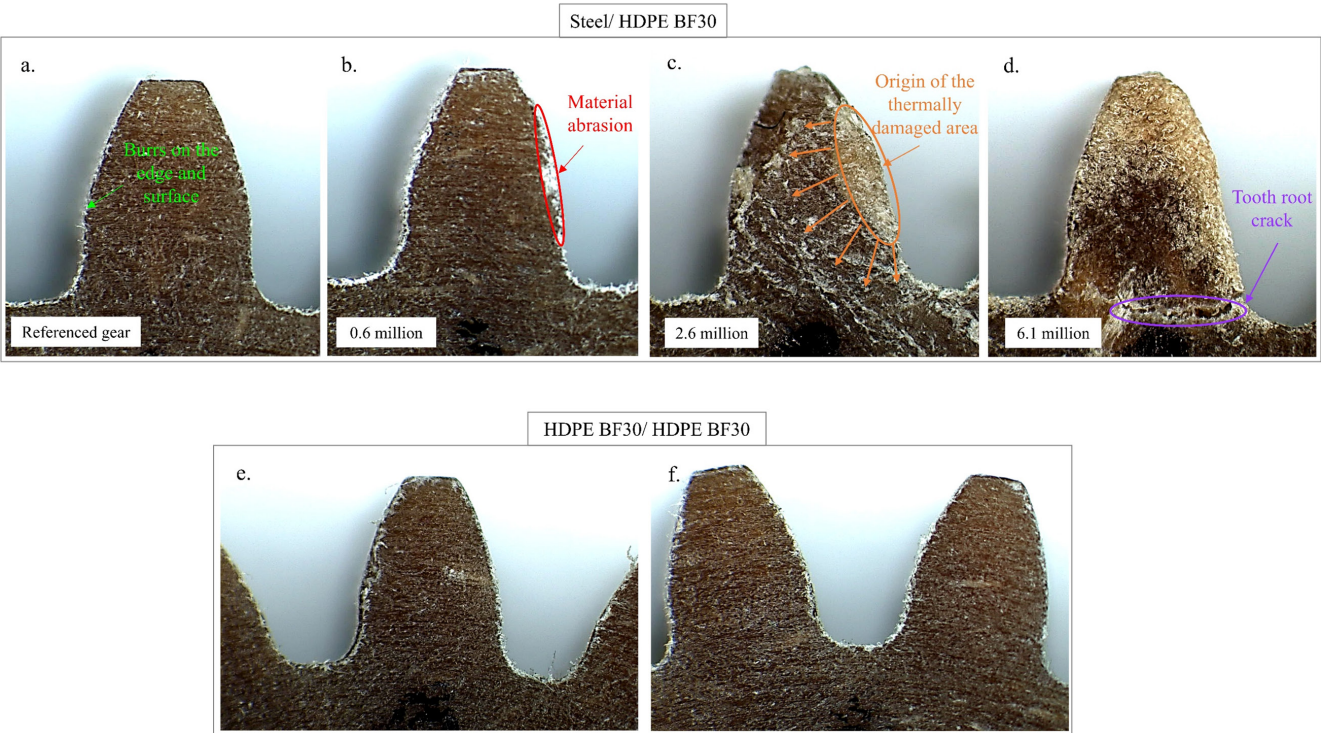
| Steel/HDPE BF30. (a) Referenced gear tooth. (b) Wear mechanism: abrasive effect. (c) Thermally damaged area. (d) Tooth root crack. HDPE BF30/HDPE BF30 exposed load 0.4 Nm. (e) Driving gear. (f) Driven gear. [Colour figure can be viewed at [wileyonlinelibrary.com](https://onlinelibrary.wiley.com)]
